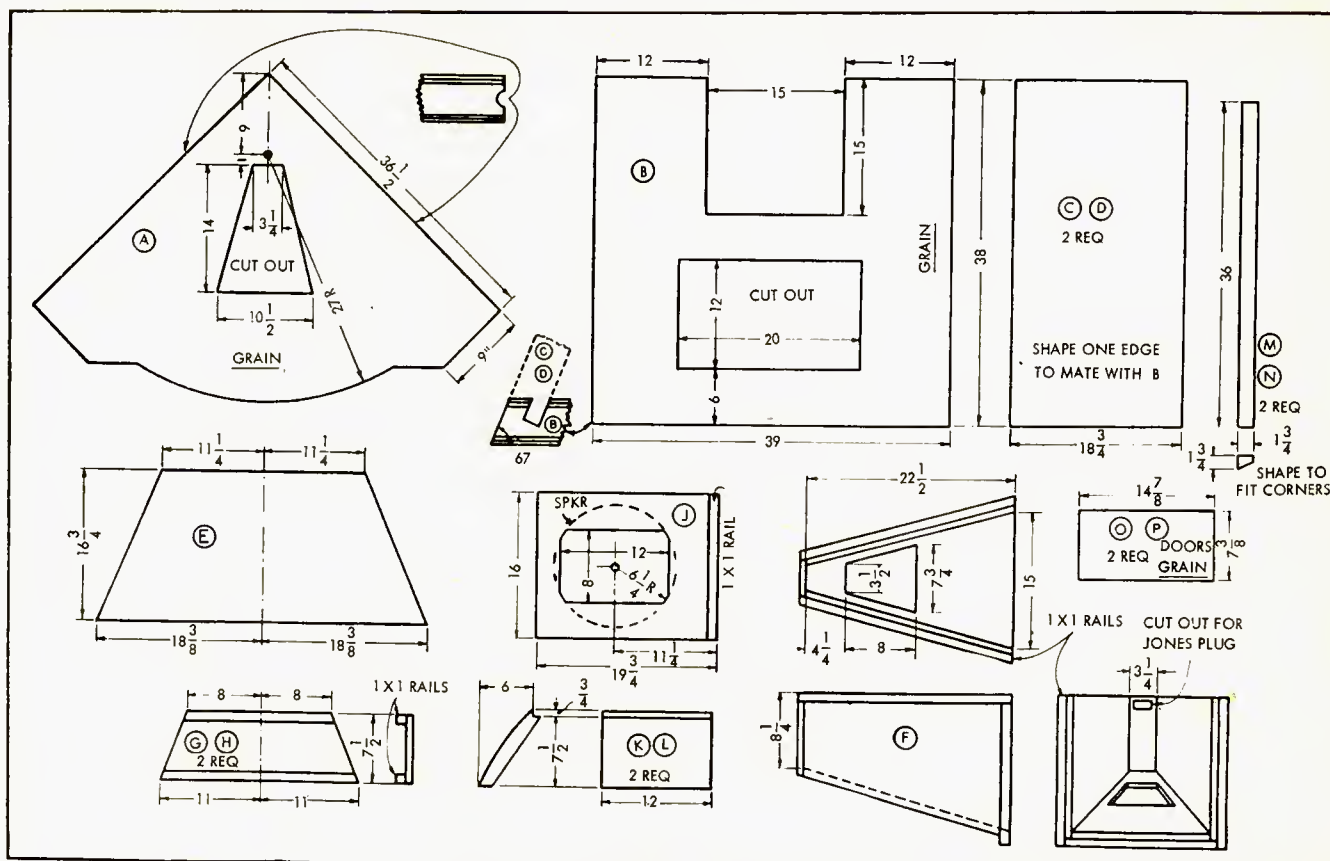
Details of the pieces which comprise the lower cabinet, speaker well, and tube enclosure. Latter is for 12-in. tube, now almost obsolete.
